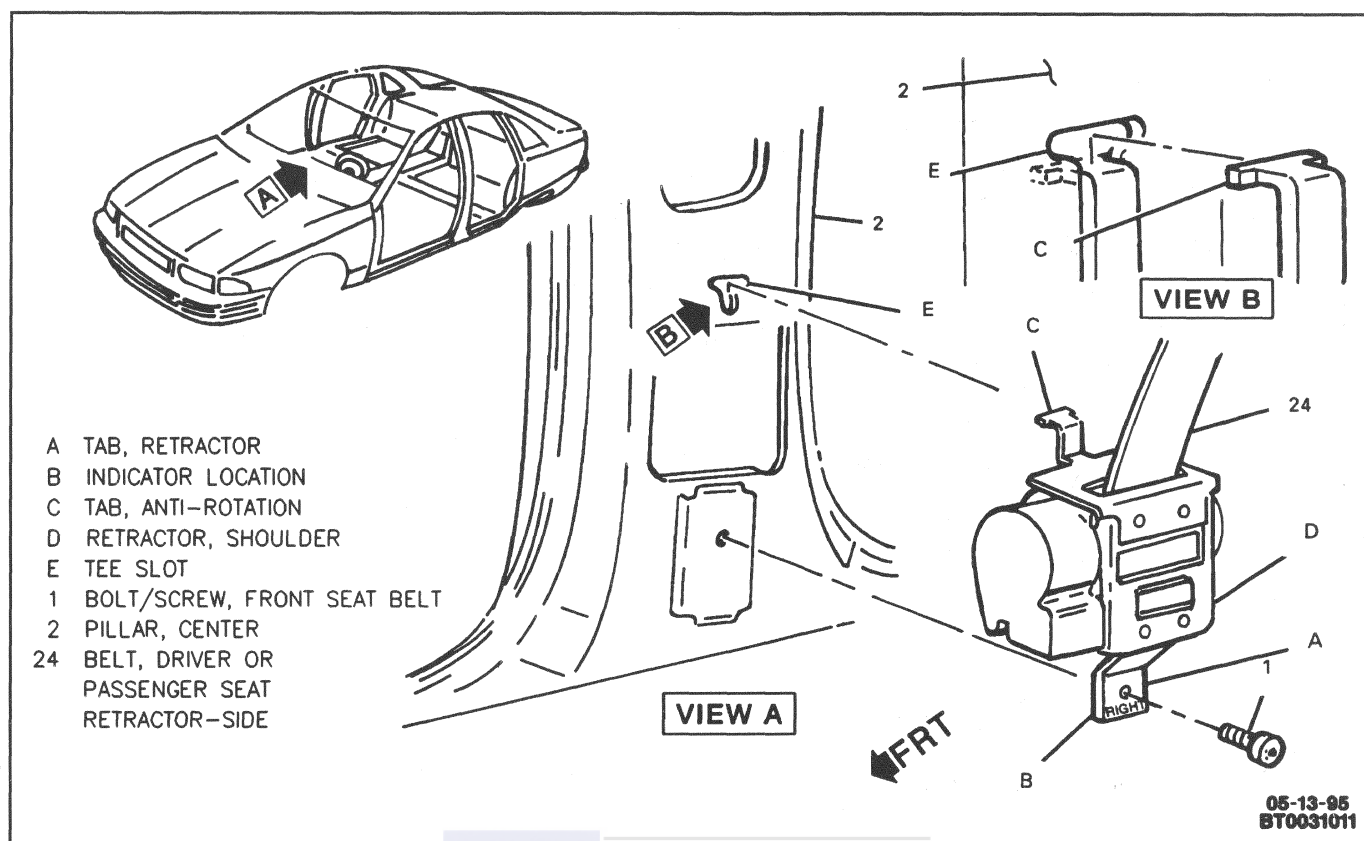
Driver and Passenger Seat Retractor Side (Center Pillar Typical)
